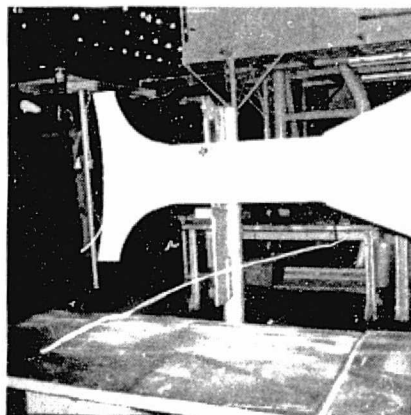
FUSELAGE KEEL - LOWER SKIN
